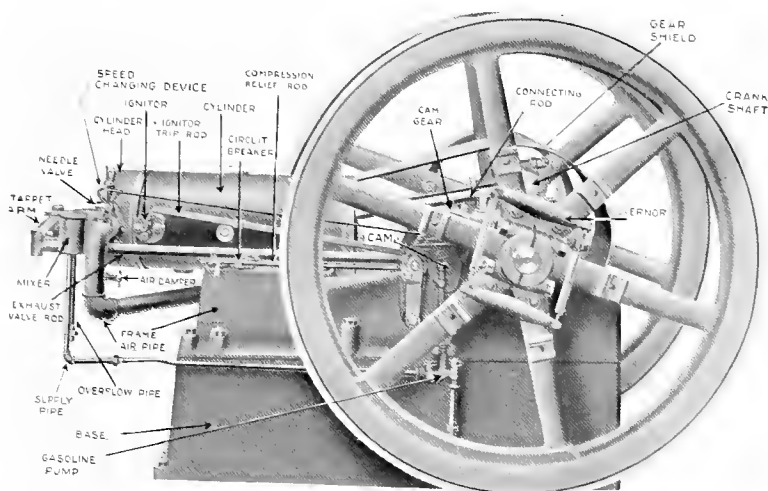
A.—A modern high-grade gasoline engine with parts named.
